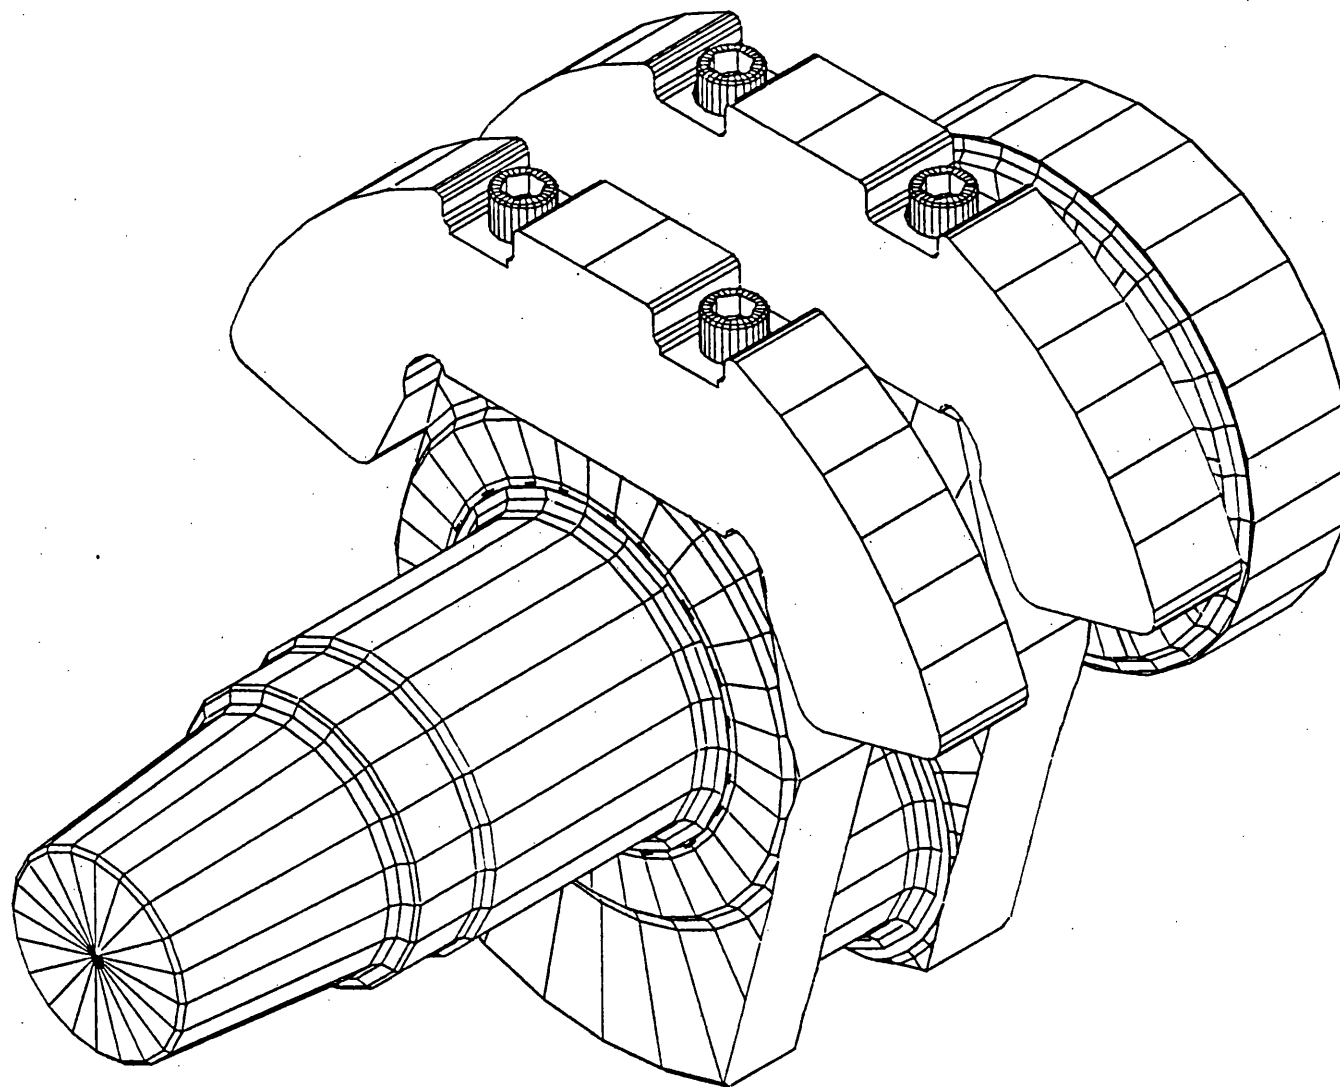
MEDUSA Model of 1SE Crankshaft Assembly
